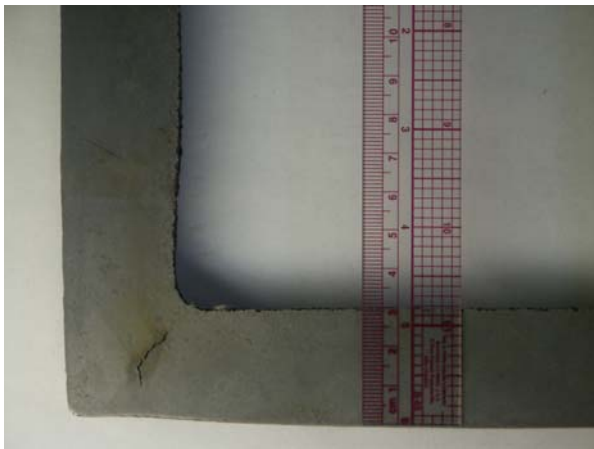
Con-cast billet after breakout showing off-corner sub-surface crack
